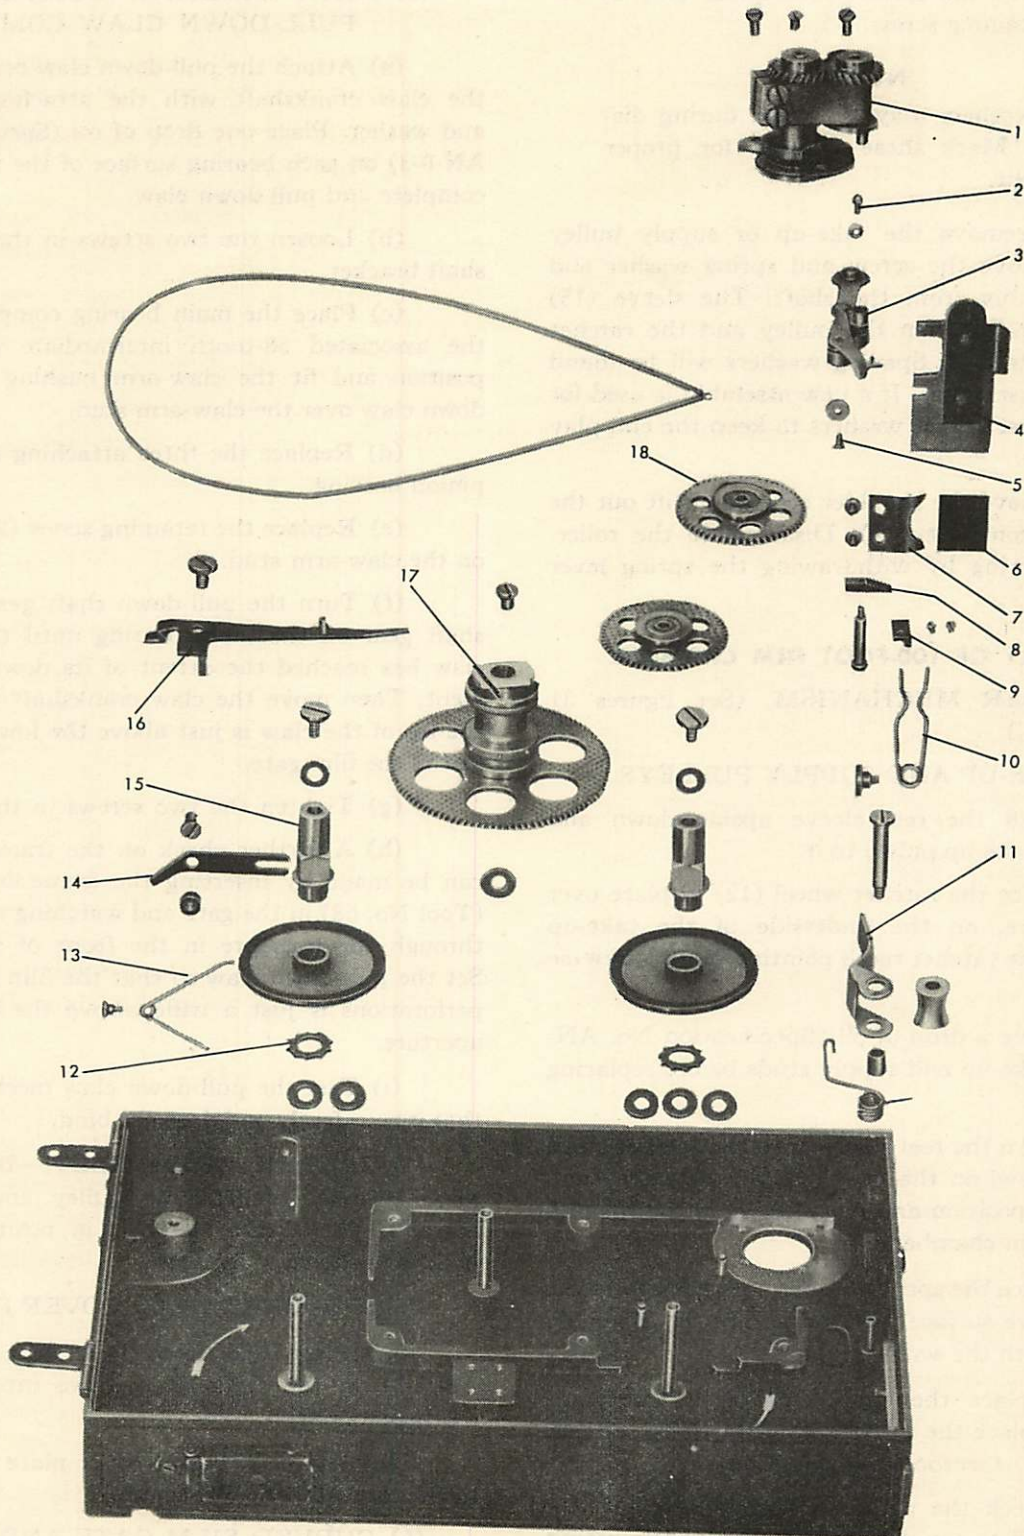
100-Foot Film Chamber—Mechanism Exploded
